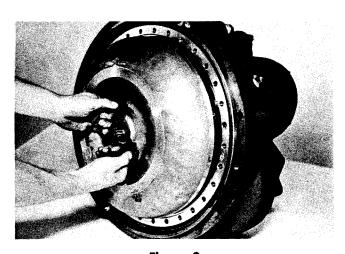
Two bolts installed in threaded holes will facilitate turbine removal.
